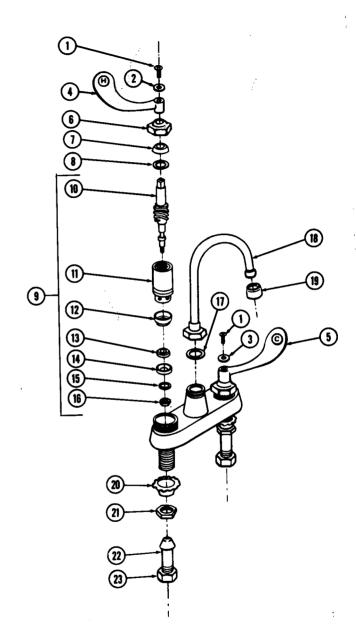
FAUCET ASSEMBLY WITH GOOSENECK SPOUT.
